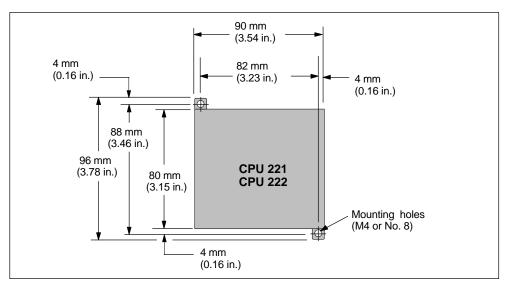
Mounting Dimensions for CPU 221 and CPU 222
